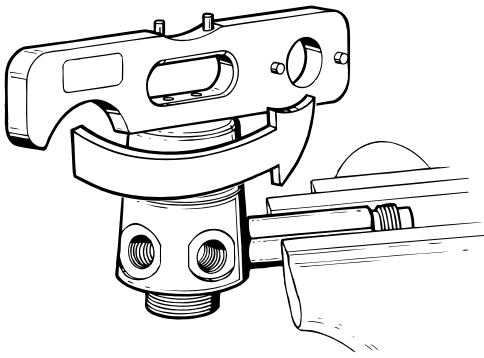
Loosening piston cap w/ Quad Spanner Wrench
